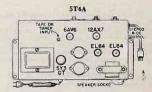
Top View of ST4A Chassis, Tube Locations Shown.
